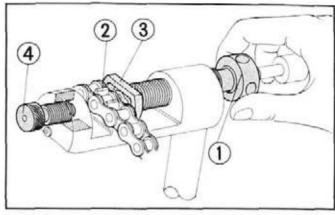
① Pressure bolt ③ Pressure holder ② Chain holder ④ Adjuster bolt
